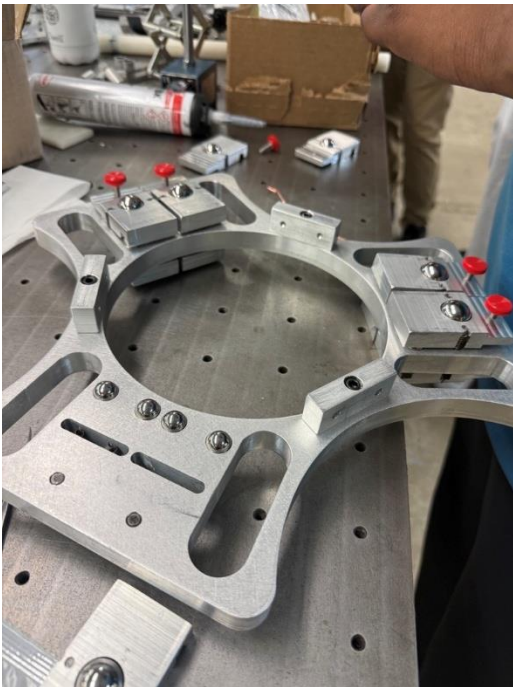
Primary Mirror mount with the press fit balls, and the adjustment wedges and partial optical mounting blocks installed.
